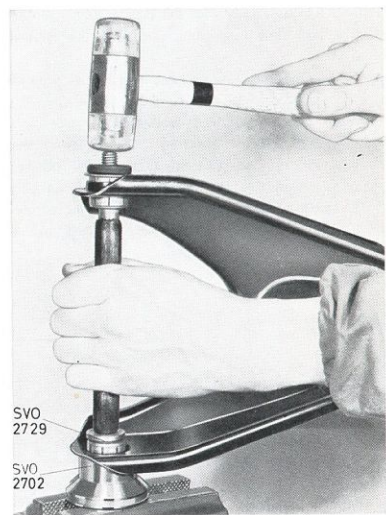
Removing control arm shaft. 2. Driving out shaft
